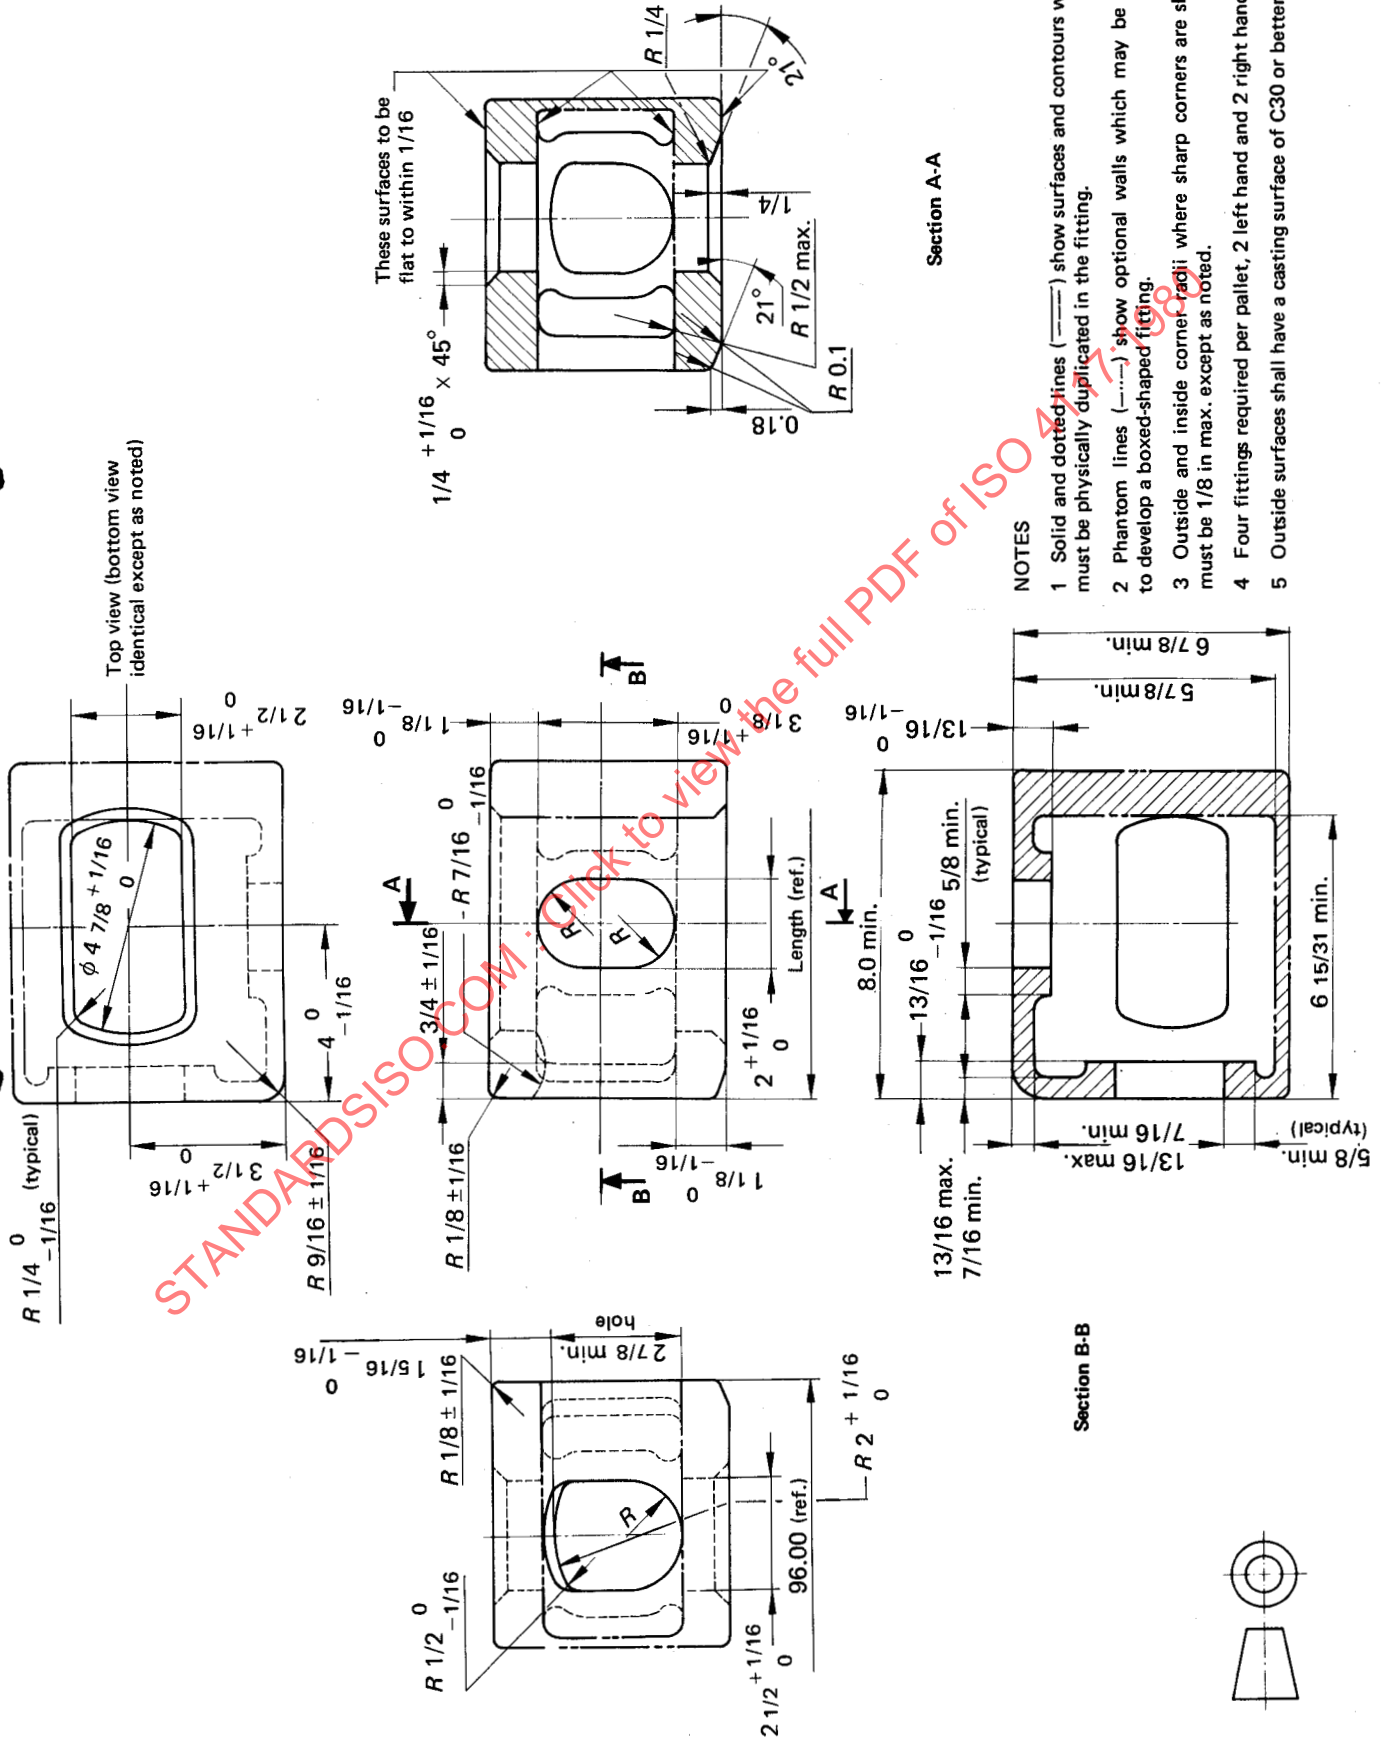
A — Flush mounted corner fitting — Dimensions in inches (see figure 7)
